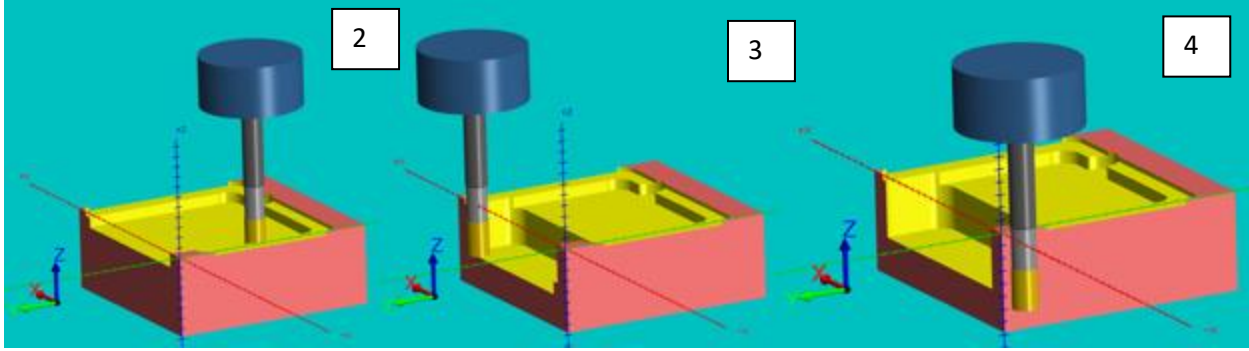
Snipping Tool Image of Steps 2,3,4 Mastercam Tool Paths
